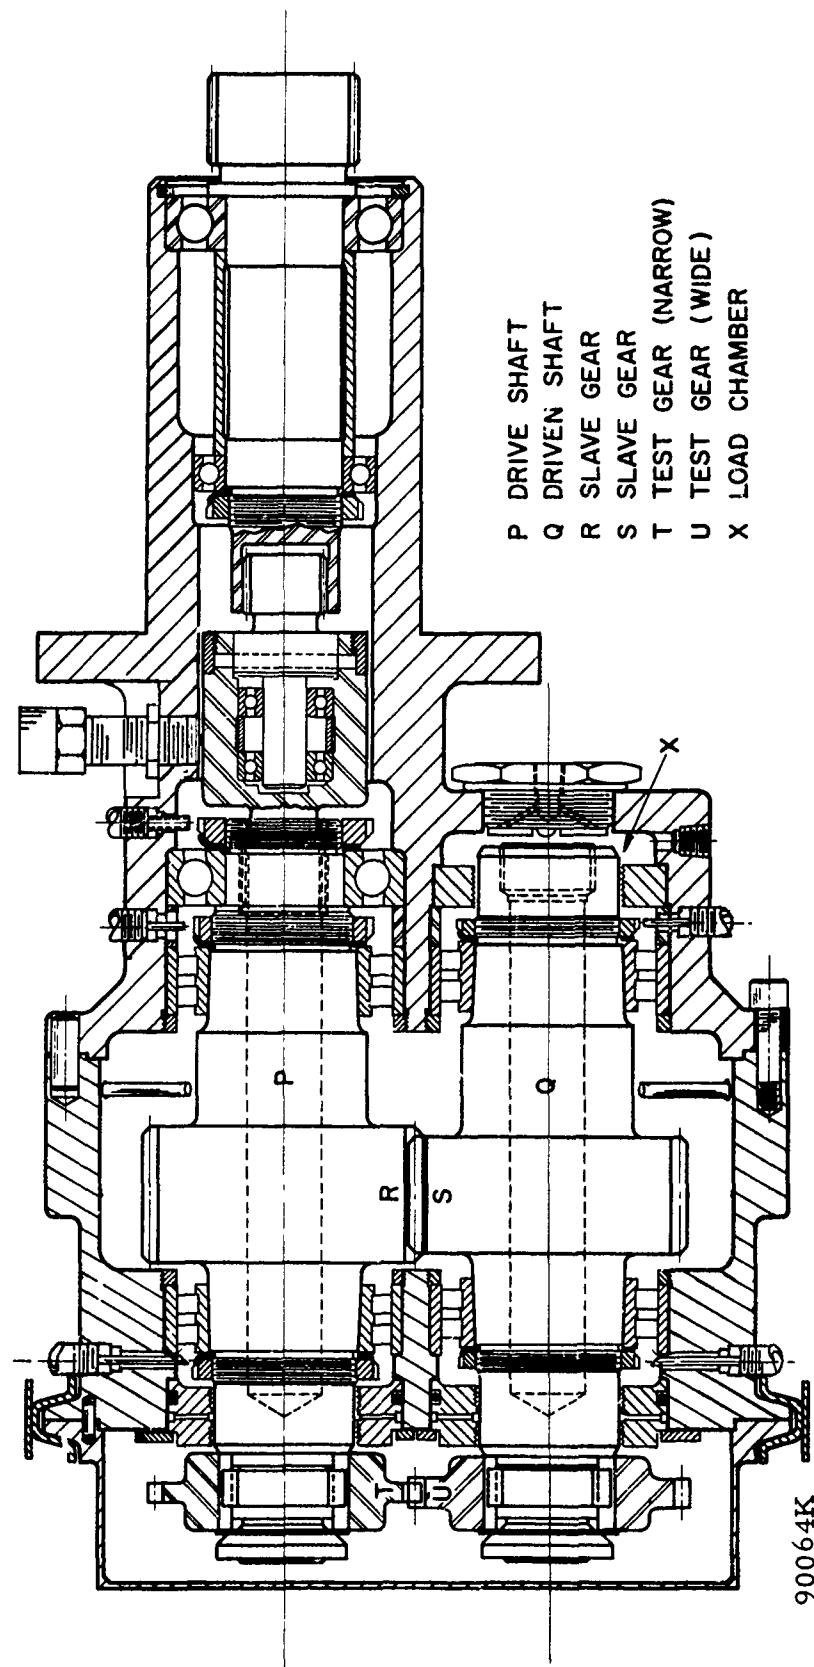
CROSS SECTION OF WADD HIGH-TEMPERATURE GEAR MACHINE
